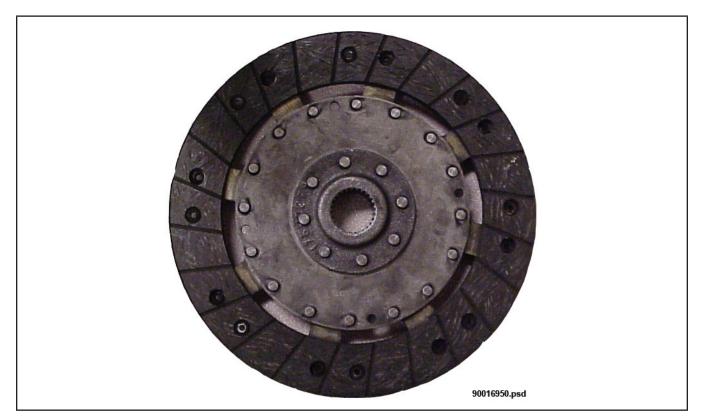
Dual Mass Flywheel Clutch Disc (PT)
